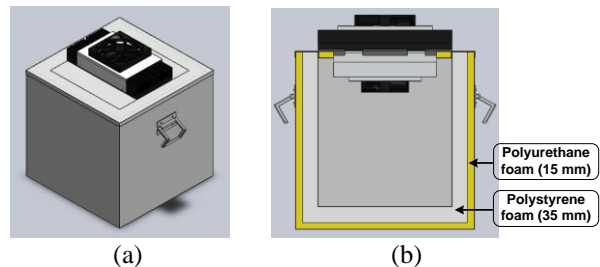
(a) Final design of cooling holder; SolidWorks® model, and (b) Cooling holder enclosure.
